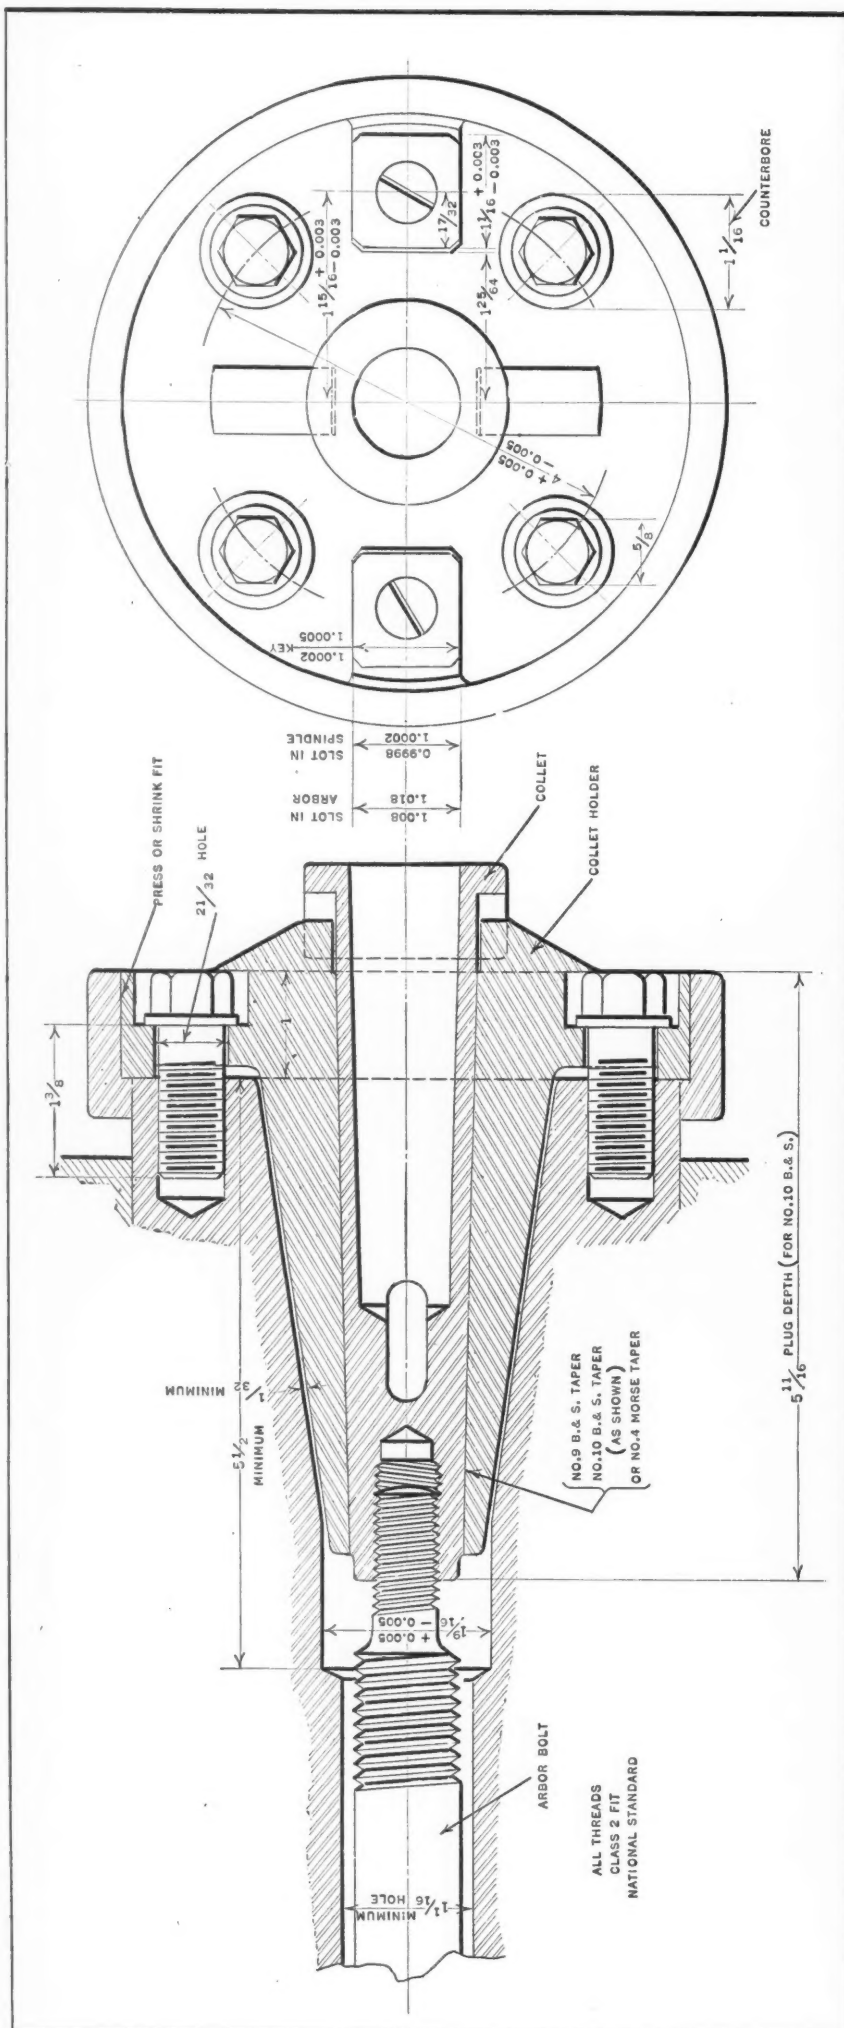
Adapter for Milling Machine Spindle which Fits over the Outside of the Spindle End and is Bolted to the Spindle Face
